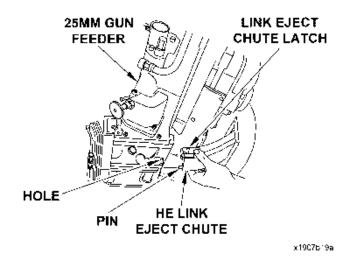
HE Link Eject Chute Latches, Pins, and Pin Holes Inspections.
